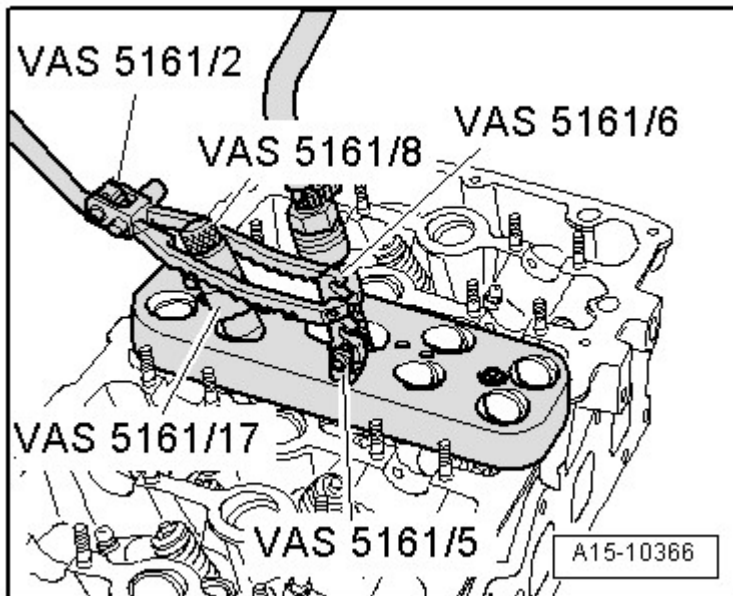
Identifying VAS 5161/8, VAS 5161/2, And VAS5161/6 With VAS 5161/5 Installed In Guide Plate
